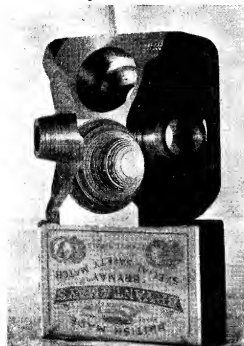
The head was made from a piece of 3 in. square mild-steel. Photograph shows it after the preliminary rough turning and boring
